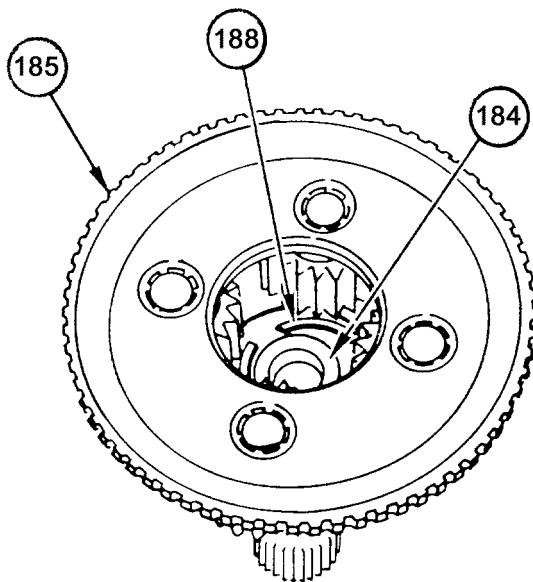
Rear (P3) Carrier Assembly. (Repeated) Figure 71. Rear (P3) Carrier Assembly.
